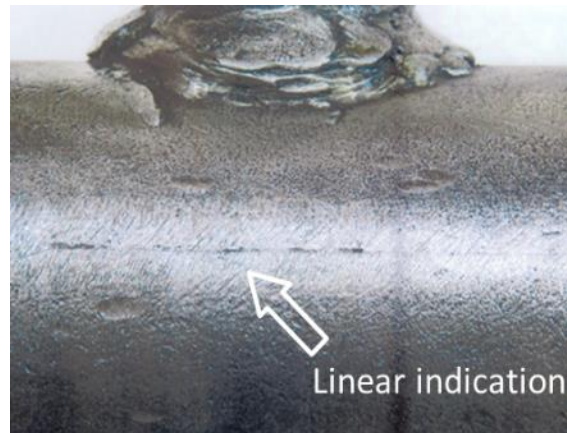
Vintage NPS 2 steel main with linear indication along weld seam
